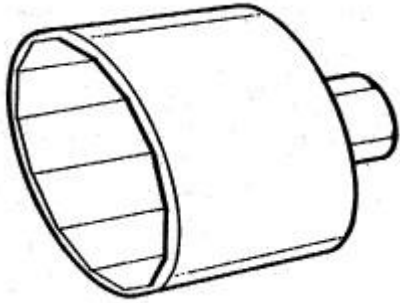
WRENCH, OIL FILTER CAP - 9551
